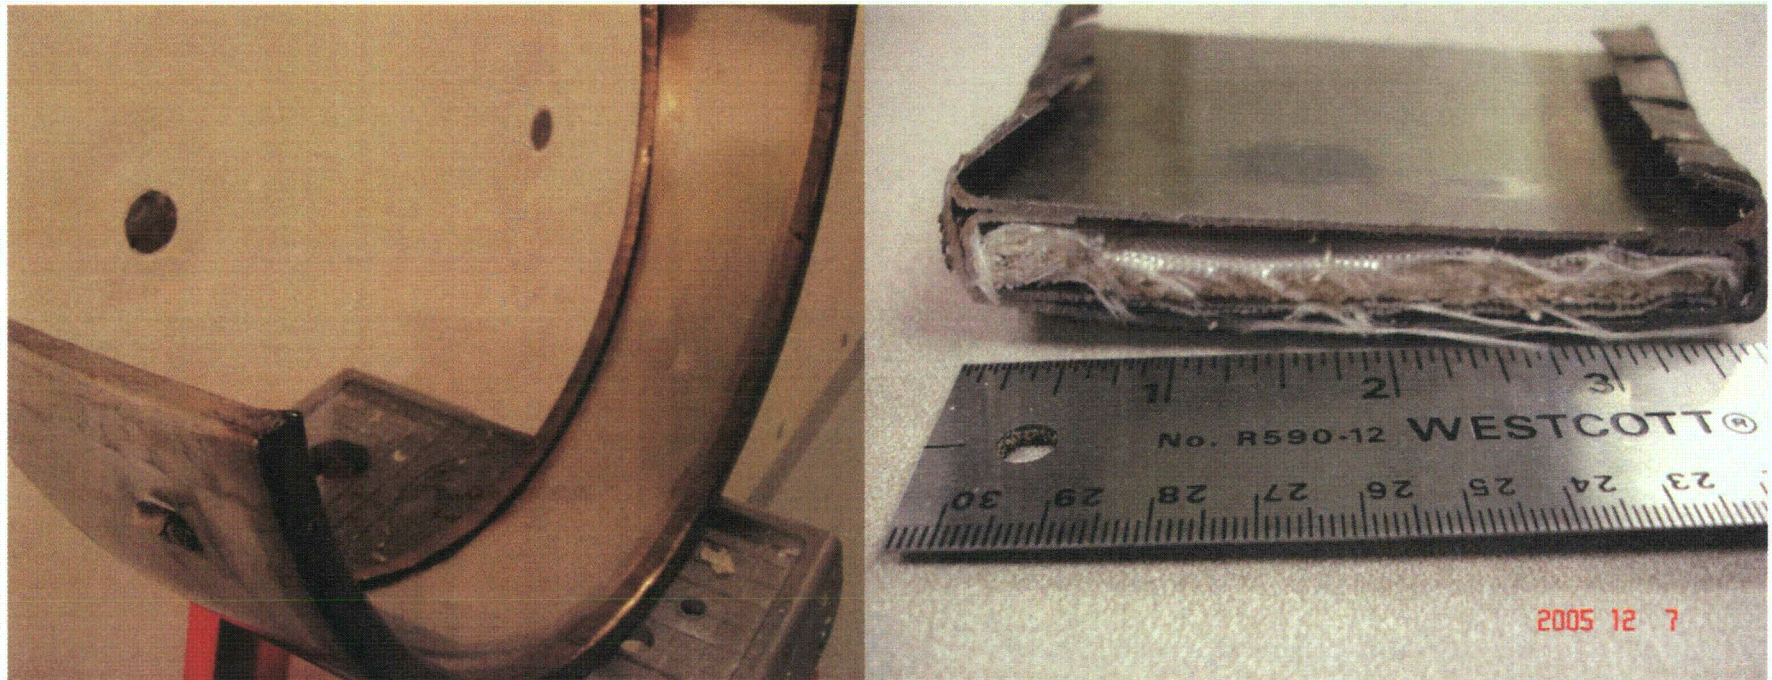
b-14 Min-K Cassette (solid ends, continuous welds)
